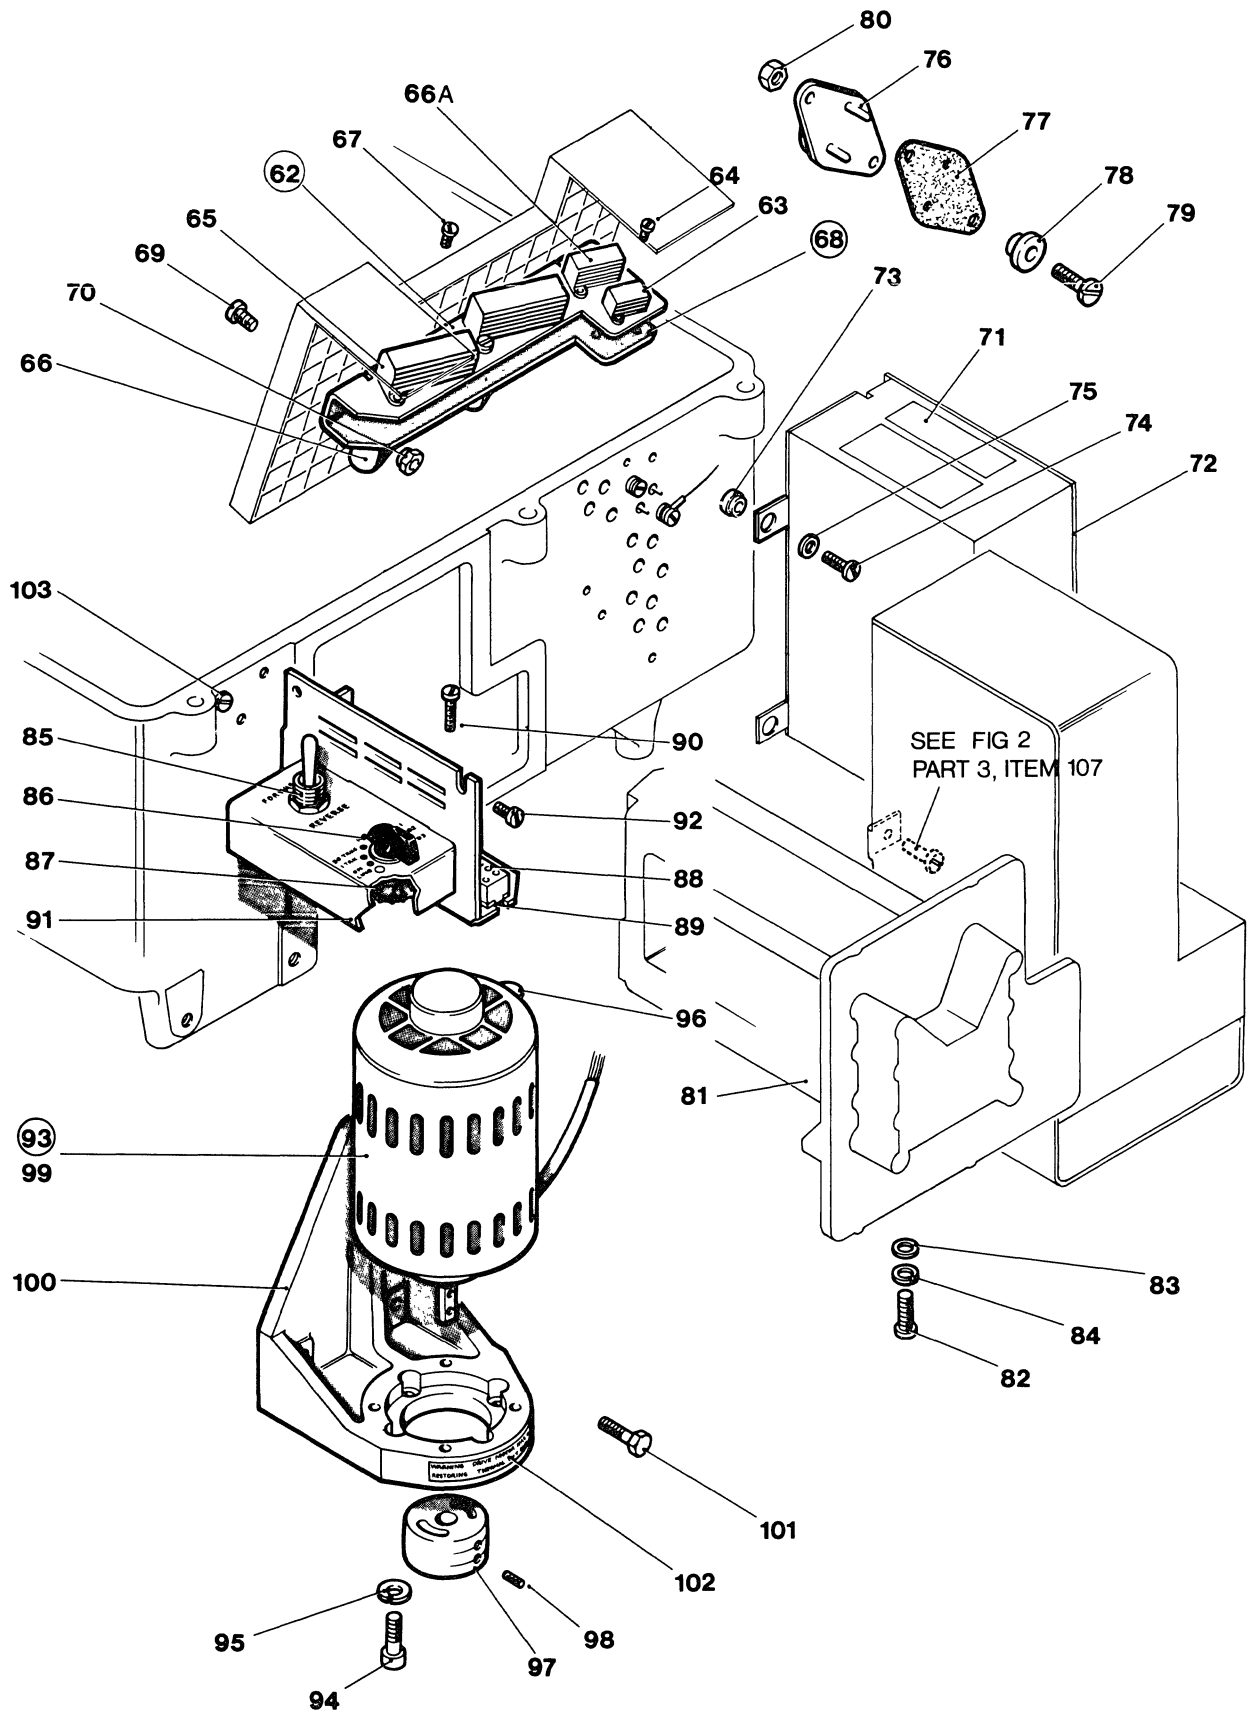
5444 DISK FILE, FINAL ASSEMBLY (PART 2 OF 4)
